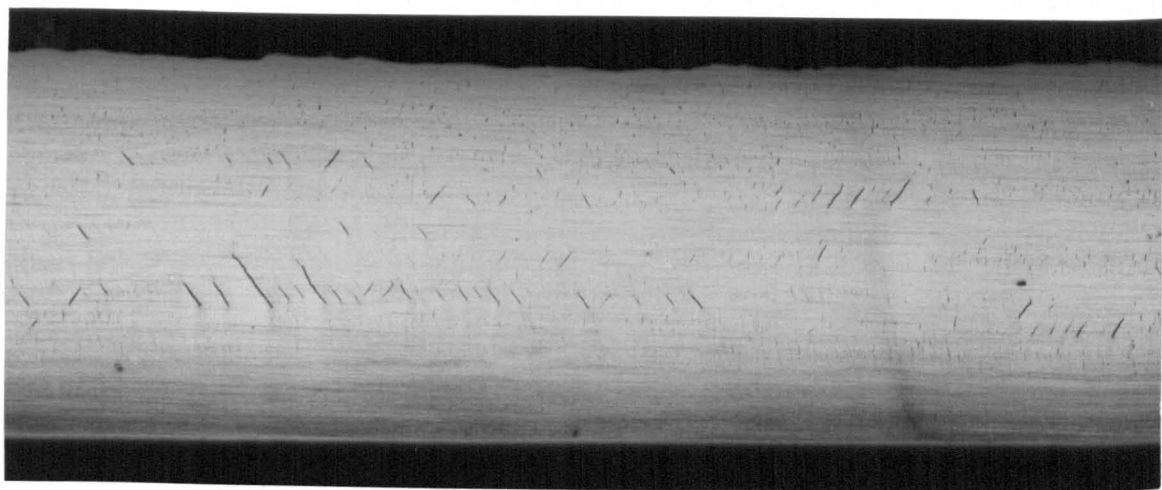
Chevron cracks in manual metal arc welds
